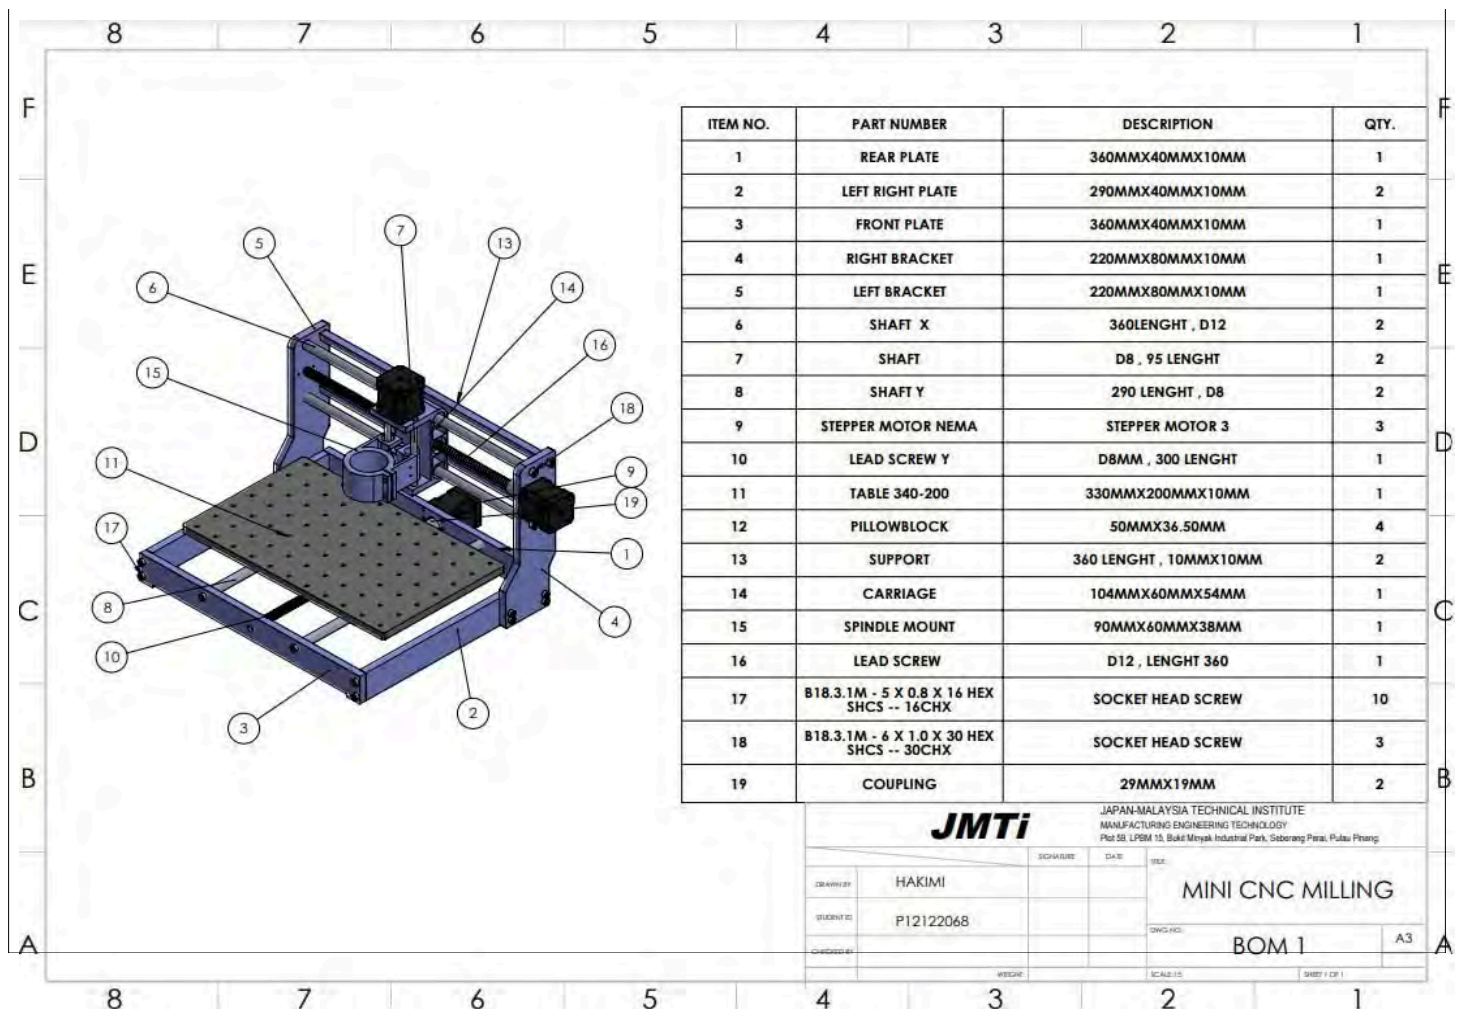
Assembly view and Bill of Materials (BOM) of the Mini CNC Milling Machine
